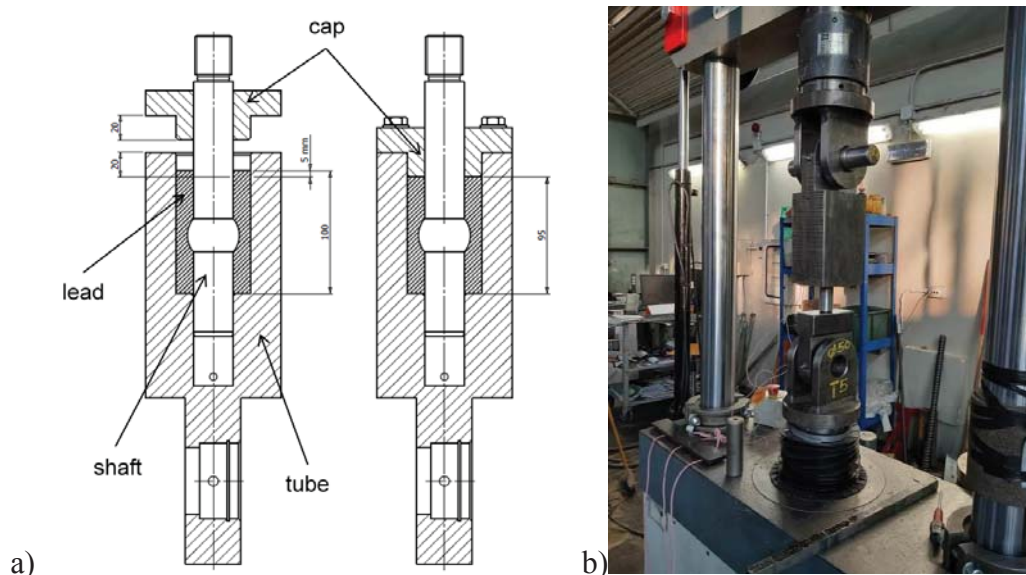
(a) Cross-section of the bulged-shaft P-LED; (b) prototype on the testing machine
